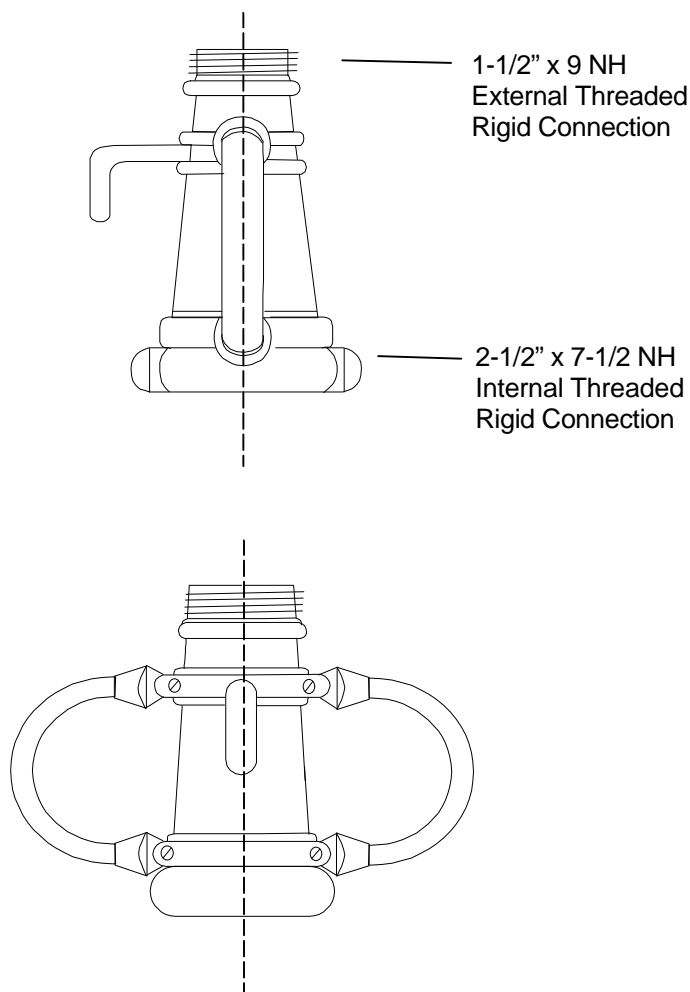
Playpipe, 2-2 ½ inch (8-11 inch length).
